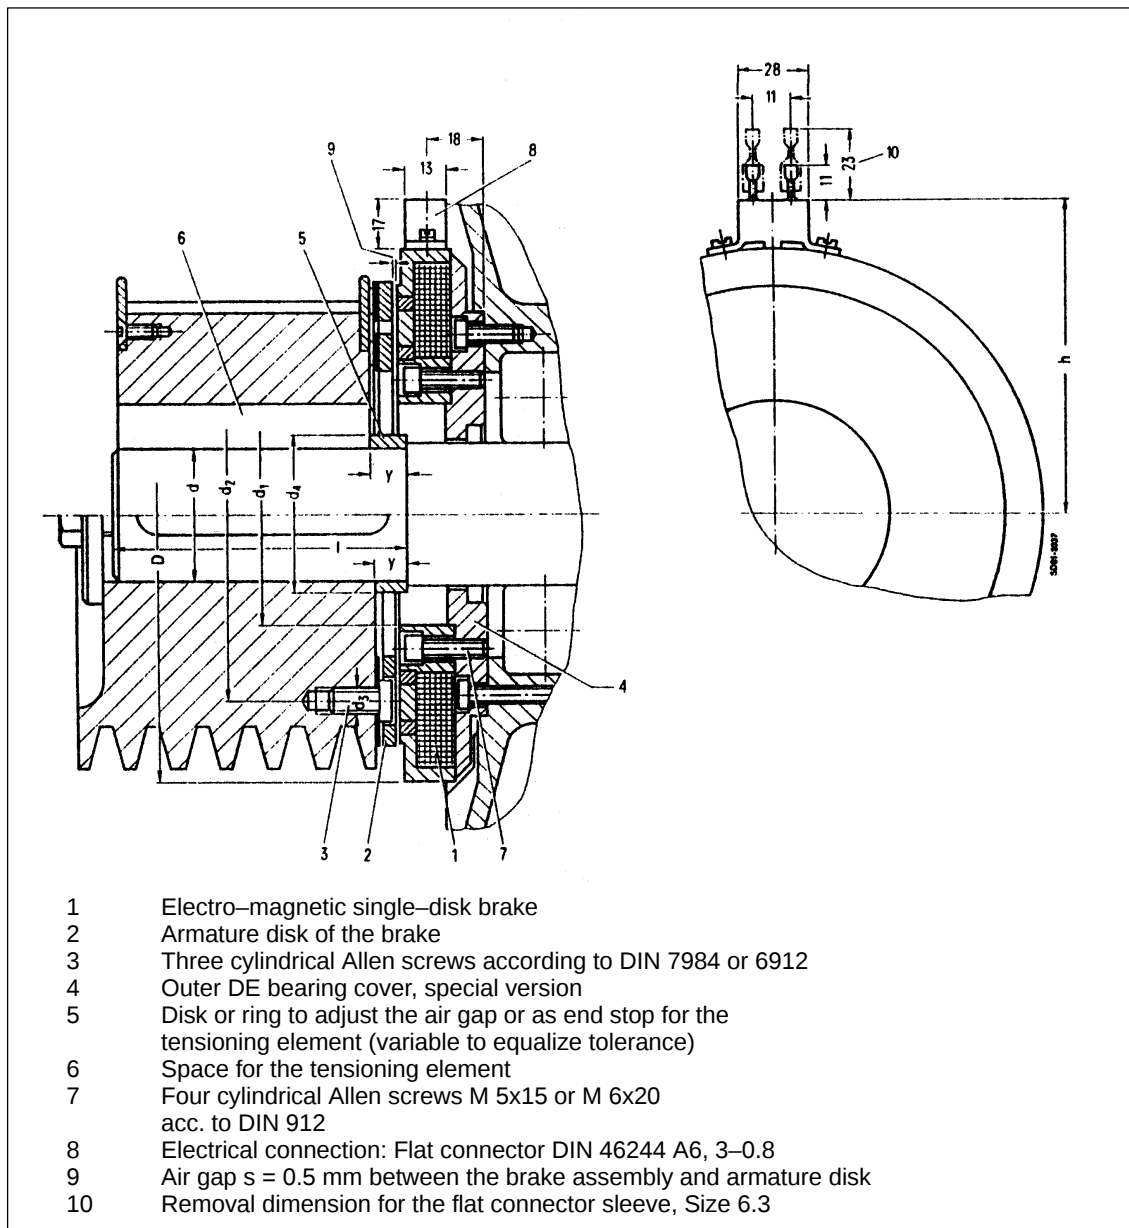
Mounting a holding brake on the drive end of AC motors 1PH410□ to 1PH416□ as an example: Armature disk mounted to a V-belt pulley with keyway (upper half) or to a toothed-belt pulley for tensioning elements (lower half)
